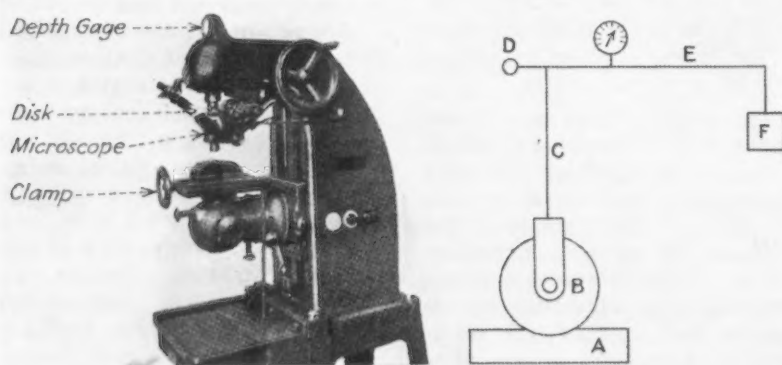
English wear testing machine. The specimen is mounted in the universal clamp which is then moved up to press the material against a rotating Widia disk.
